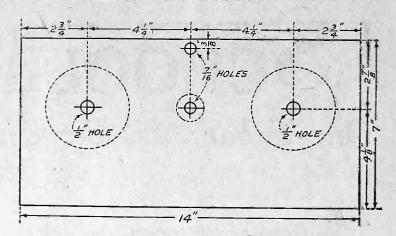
LAYOUT OF FRONT PANEL OF 7x14" BAKELITE OR HARD RUBBER IS USED WITH BASEBOARD. THE DOTTED CIRCLES SHOW WHERE THE EDGES OF 4-IN. DIALS AND 1-IN KNOB COME.
